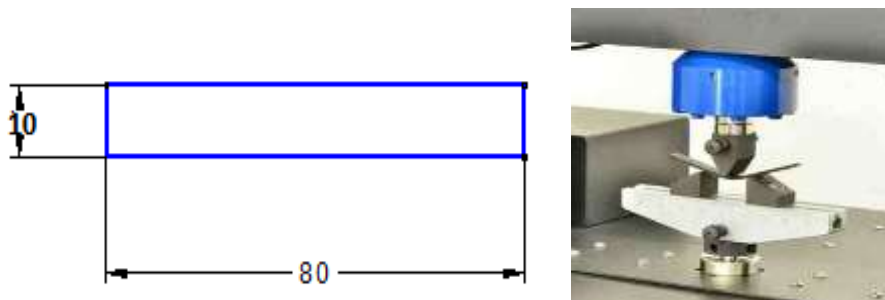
Flexural test specimen and Flexural Testing Machine
